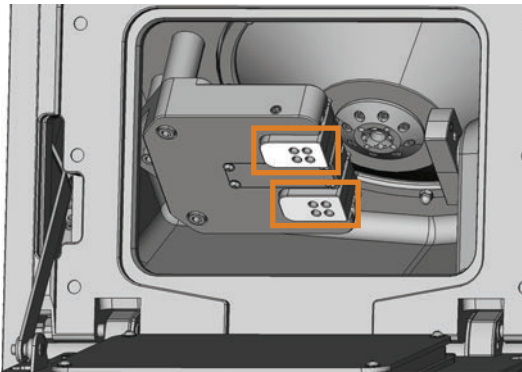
TOOL MAGAZINES IN THE WORKING CHAMBER OF THE MACHINE
